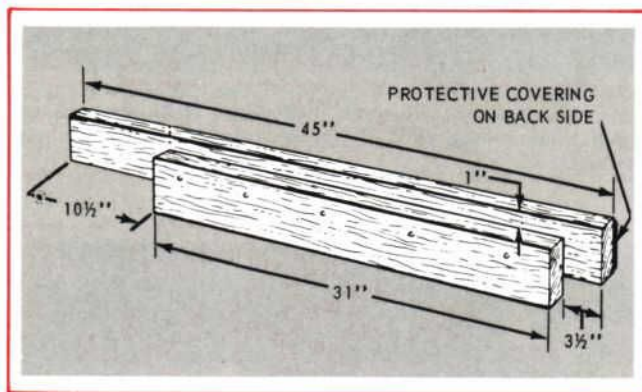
Here are the dimensions of the wood adapter device required for towing the 1971-72 Capri safely and without damaging sheet metal or painted surfaces.
